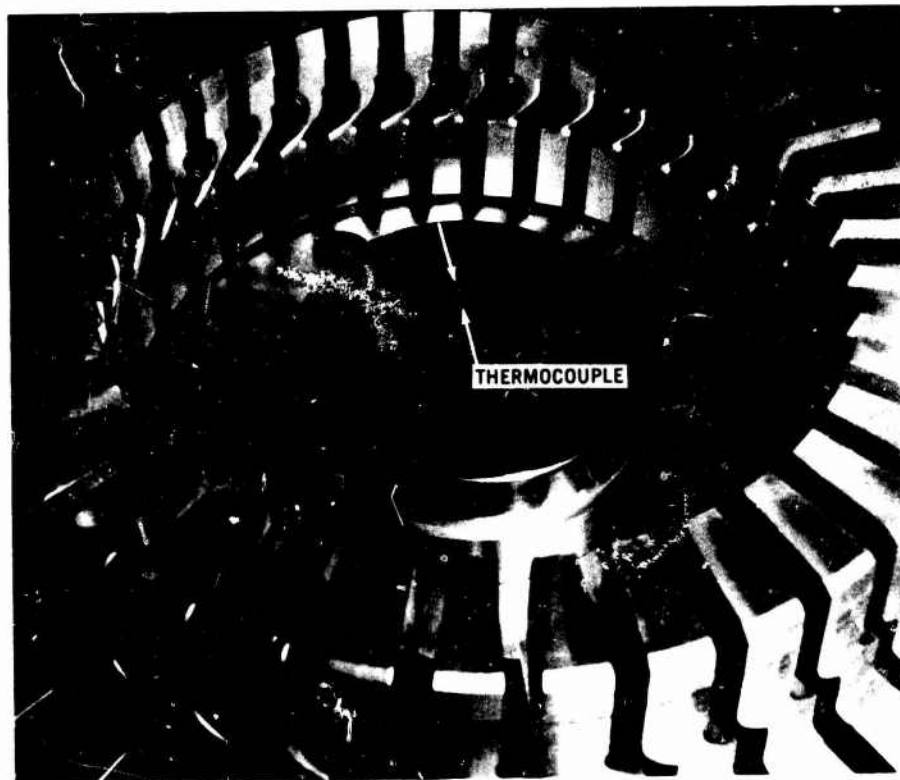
Movable Half of Rotor Blade Ring Tool Showing Thermocouple for Measuring Temperature
